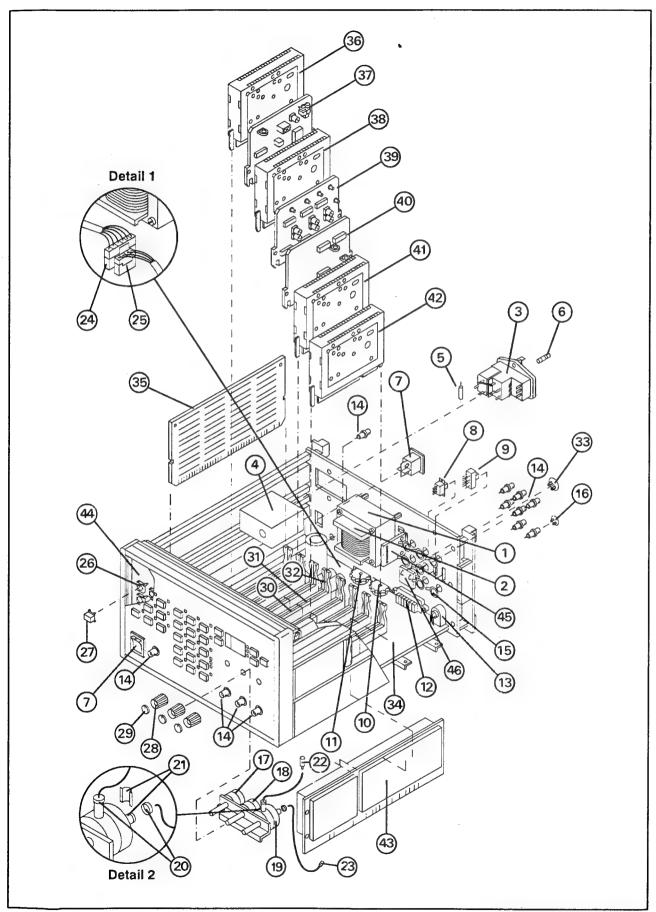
Mechanical parts on units, cables, miscellaneous
